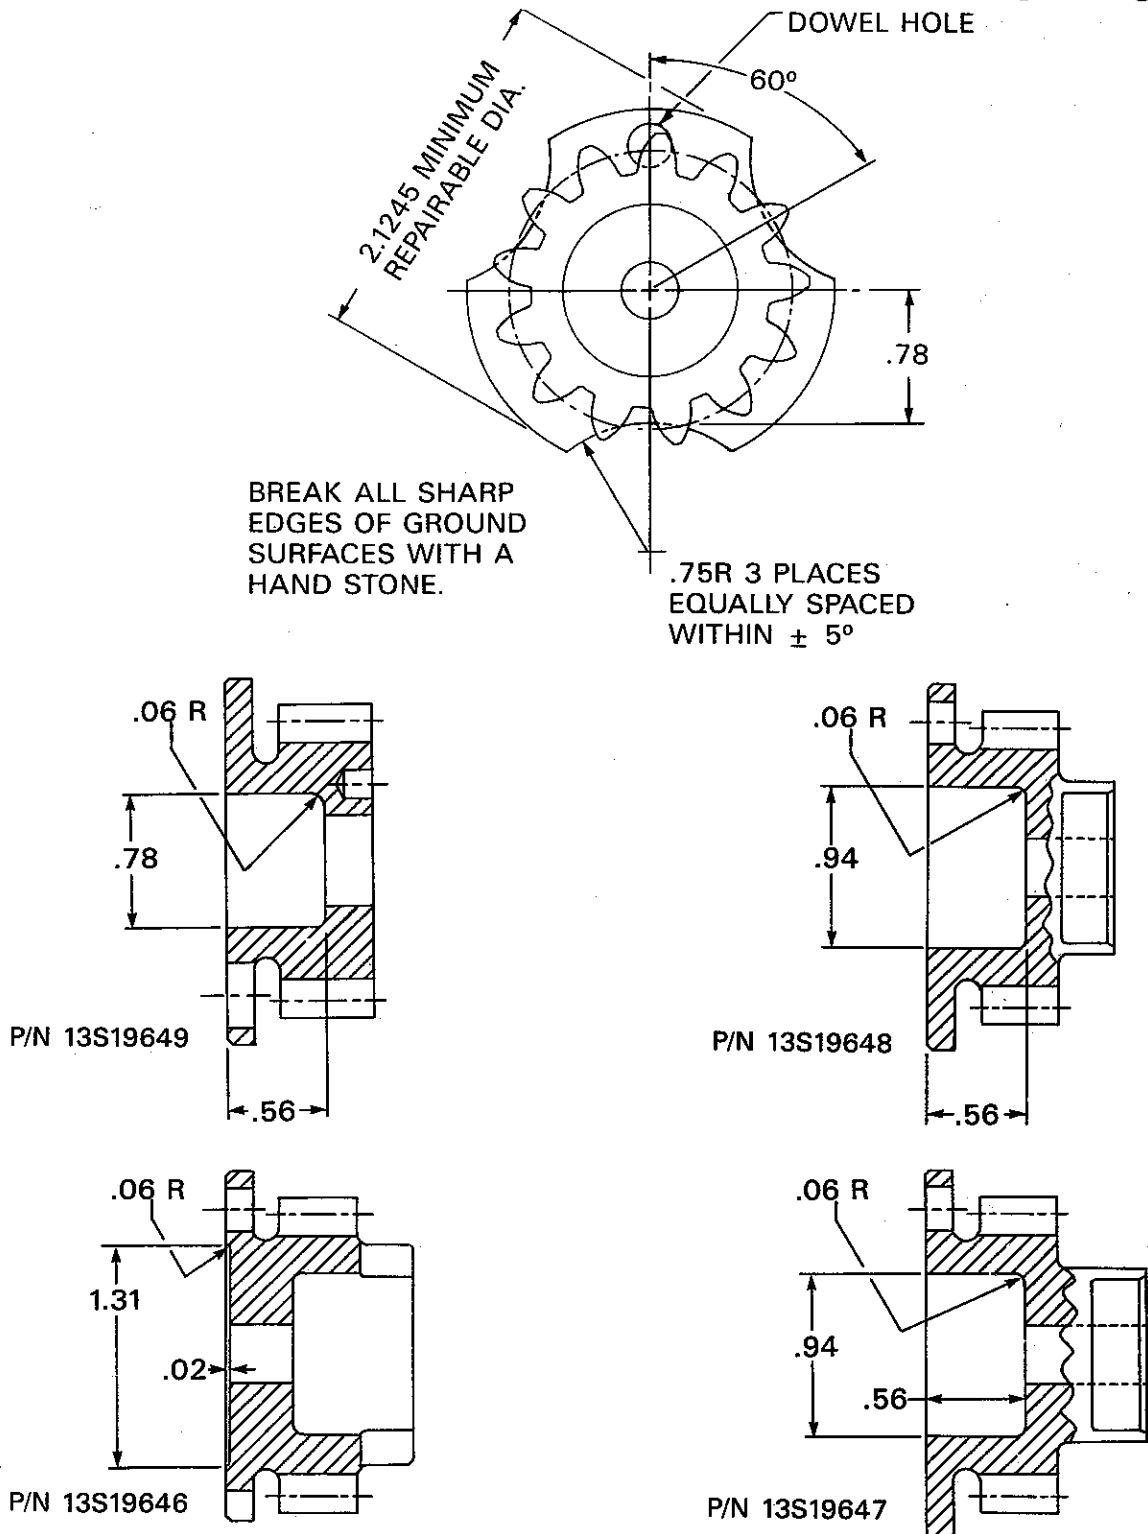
E. Details for Rework of Crankshaft Gears to Current Configuration
